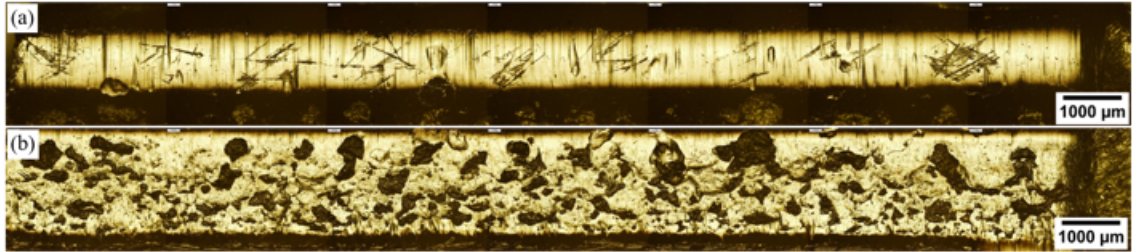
Examples of gear teeth mould images in the lubricated test (at 3.25 million cycles). (a) Addendum. (b) Dedendum.
